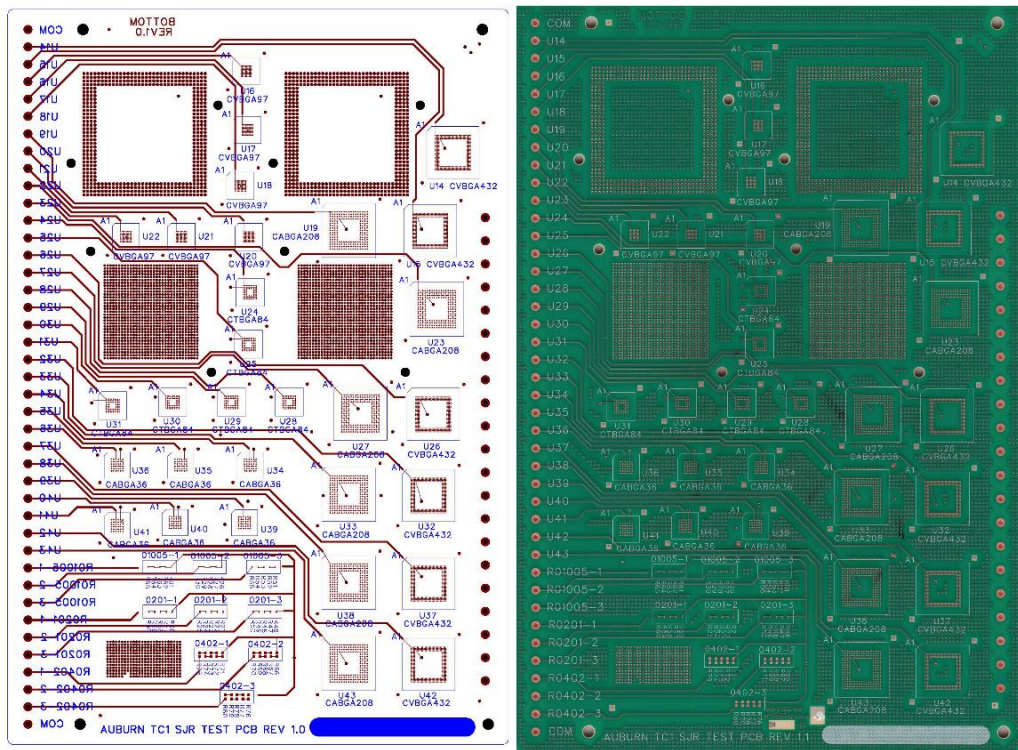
TC1-SRJ Test Vehicle: Bottom-Side (Schematic and Un-assembled PCB).
